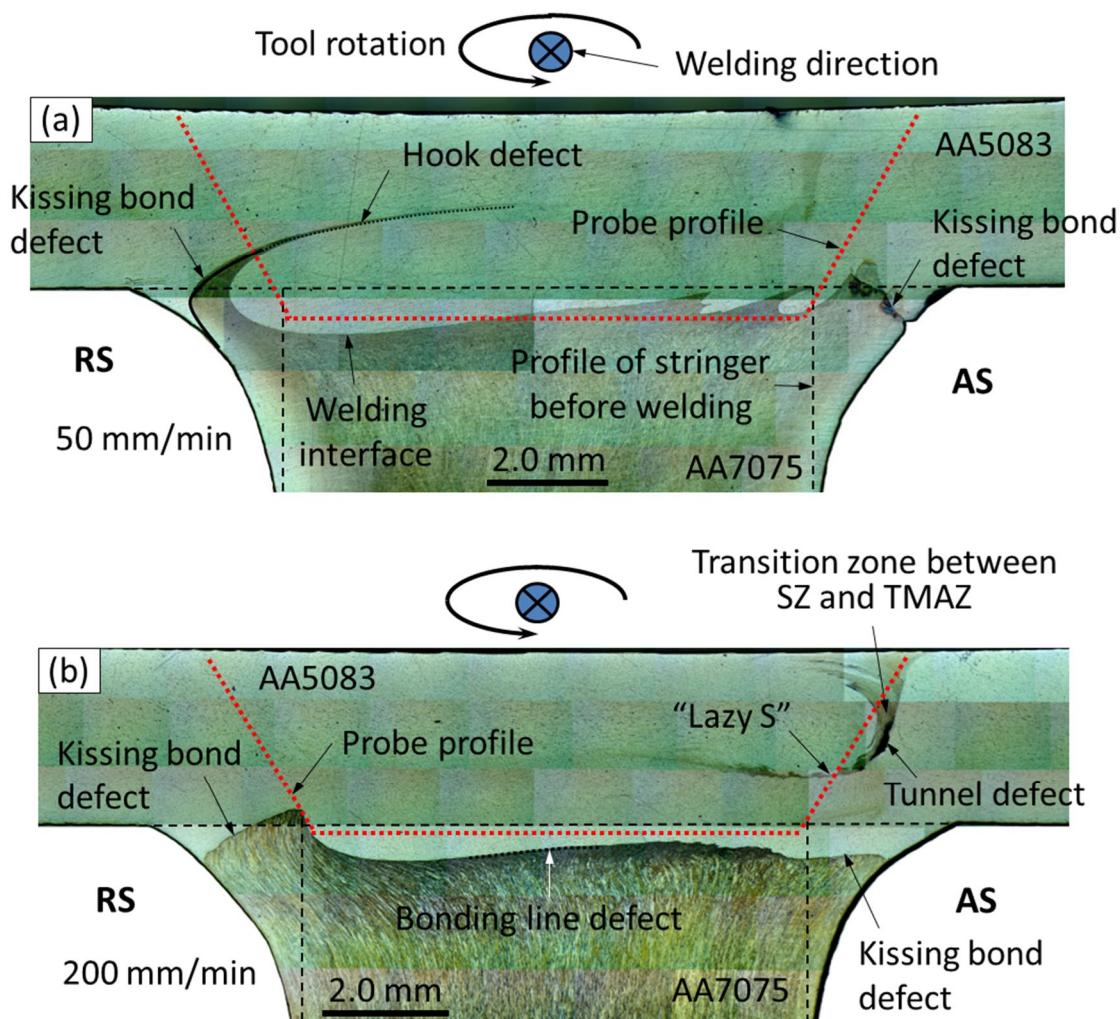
Macrostructures on the cross-section of specimens produced by welding speed of (a) 50 mm/min and (b) 200 mm/min.
